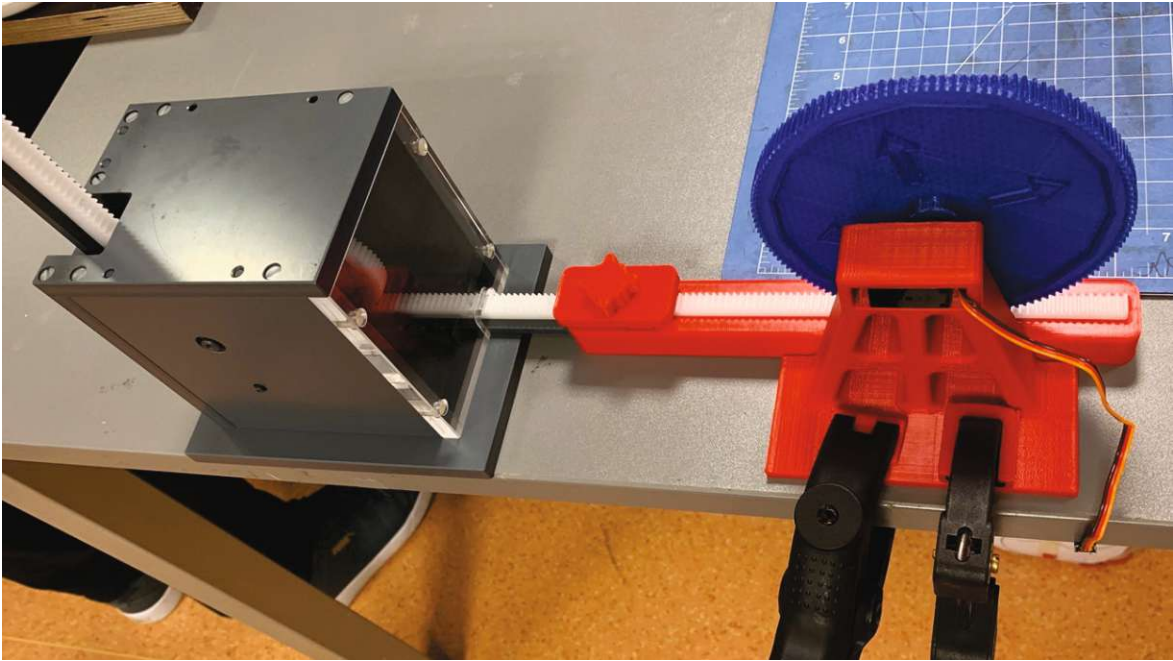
Photograph of the manufactured test parts attached to the Gear Box.
